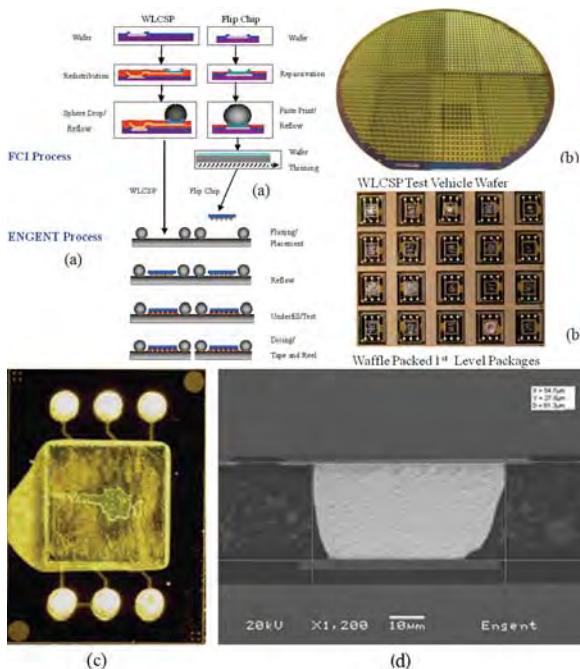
3D Wafer Level CSP technology (a) Flip Chip Process Flow, (b) Wafer Level Assembly and Singulated 3D-WLCSPs. (c) ACT Die Flip Chip Mounted to PA Wafer, (d) ACT to PA Flip Chip Interconnect
